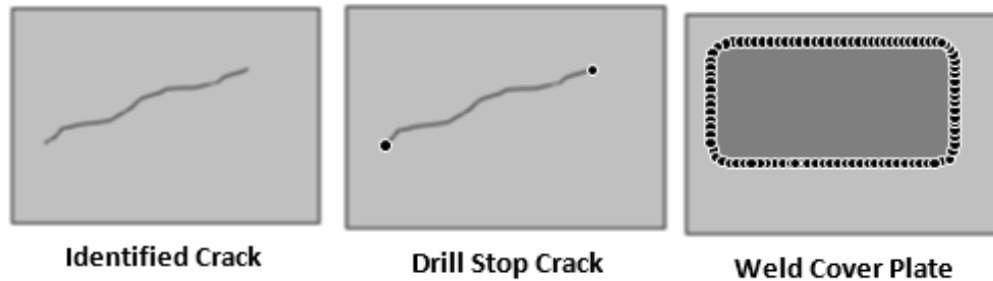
Temporary Crack Repair via Doubler Plate [6]
